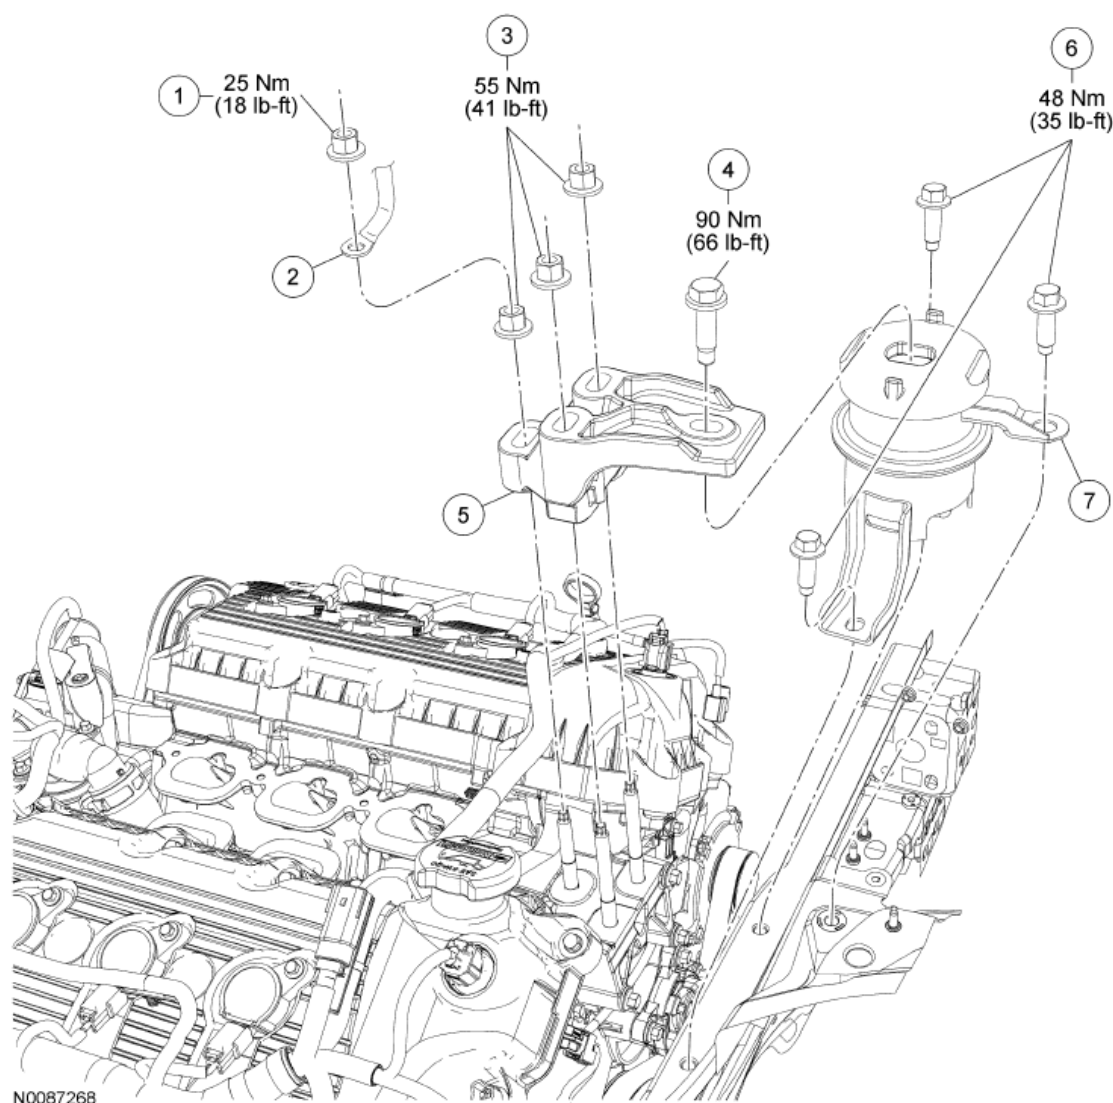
Identifying Engine Support Insulator Bracket With Bolts
